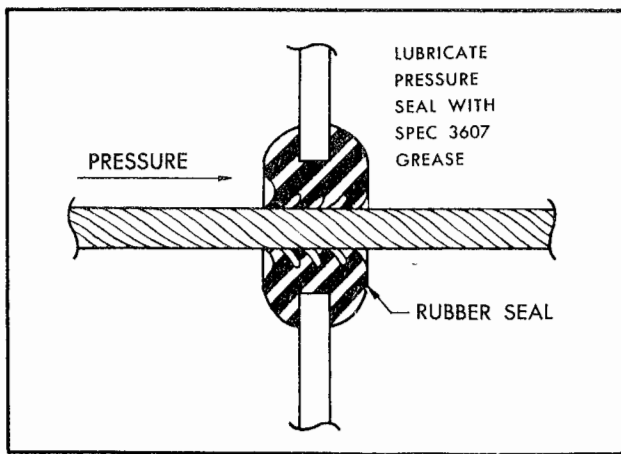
Cockpit Sealing — Rudder Cable Seal
